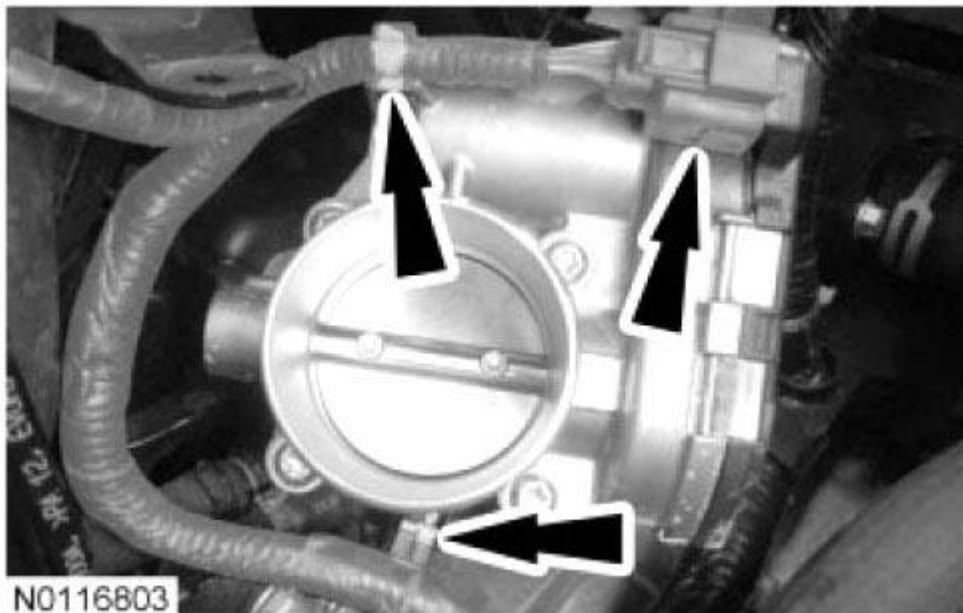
Locating Throttle Body (TB) Electrical Connector
